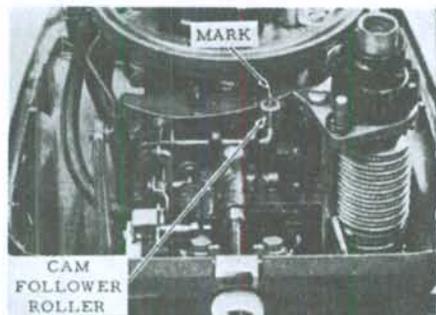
View of index mark on synchronizer cam aligned with center of cam follower roller.
